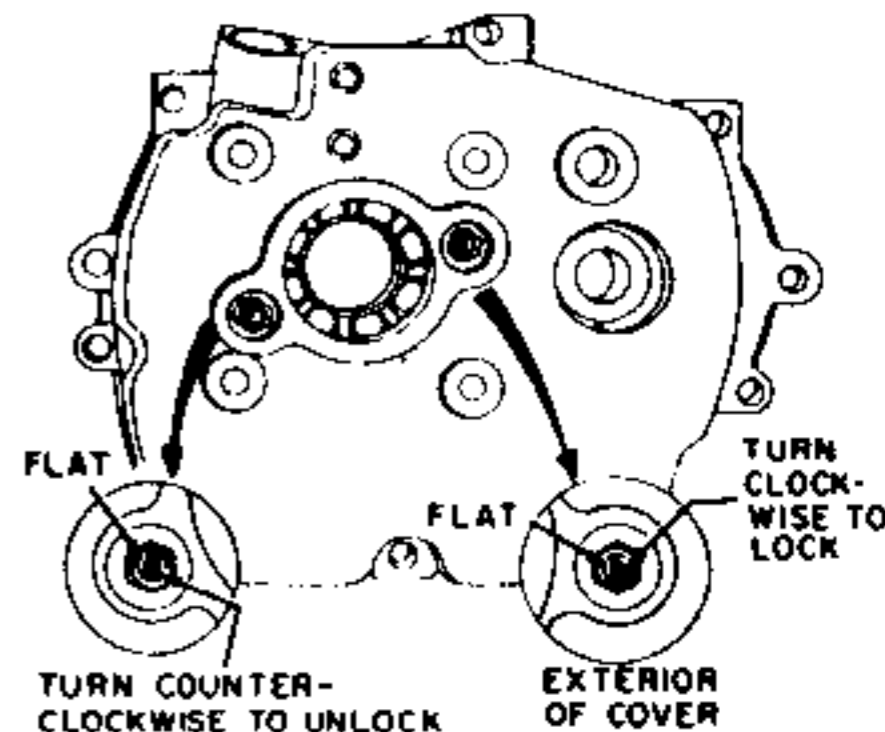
View showing bearing locks on Models HM70, HH70, HM80 and HM100 equipped with ball bearing main. Locks must be released before removing crankcase cover. Refer to Fig. T37 for interior view of cover and locks.
